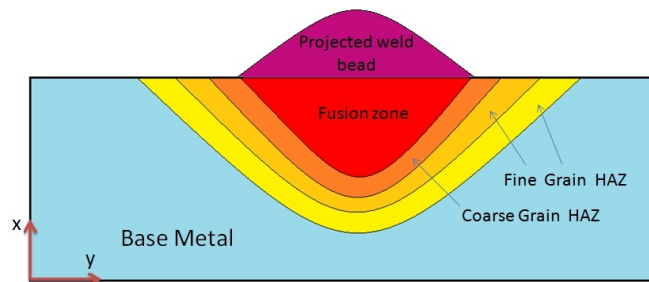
Schematic diagram showing various zones in the cross-section of a weld deposition
